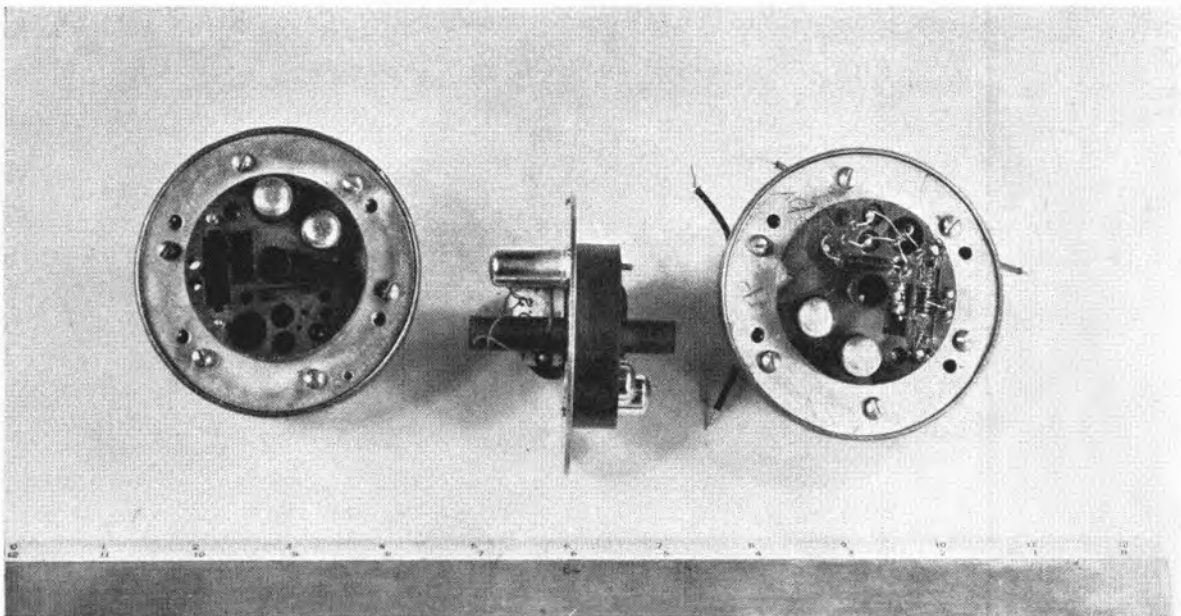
Oscillator assembly using thermoplastic block (Zenith photograph).
